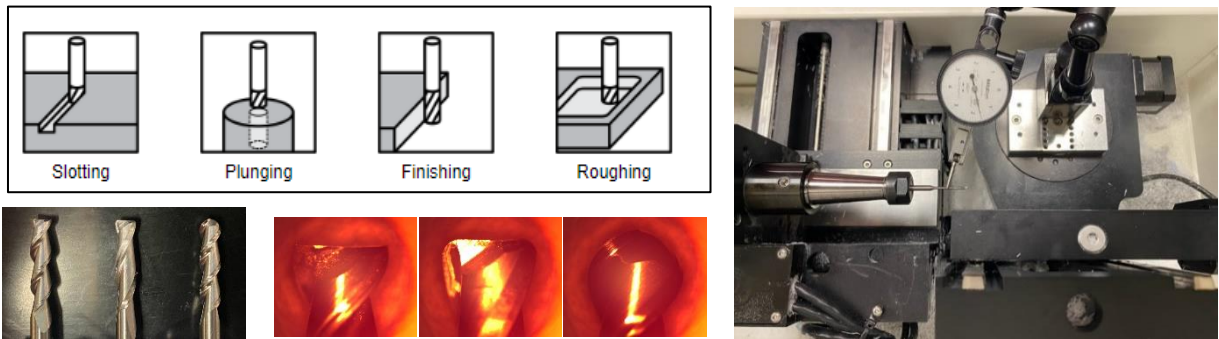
Illustration of common machining strategies (top left), comparison between flat, bull, and ball end mills under different magnifications (left to right, bottom left), and example of a tensile indicator being used to measure tool runout (right).
